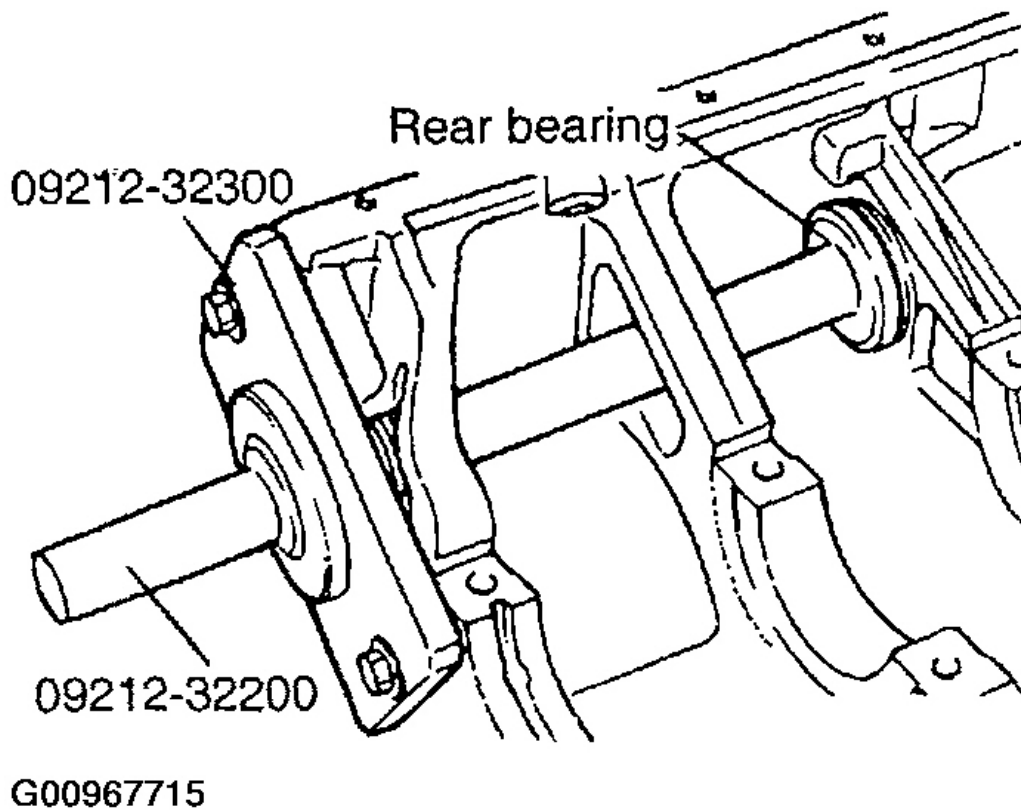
Installing Rear Bearing Of Left Counter Balance Shaft
